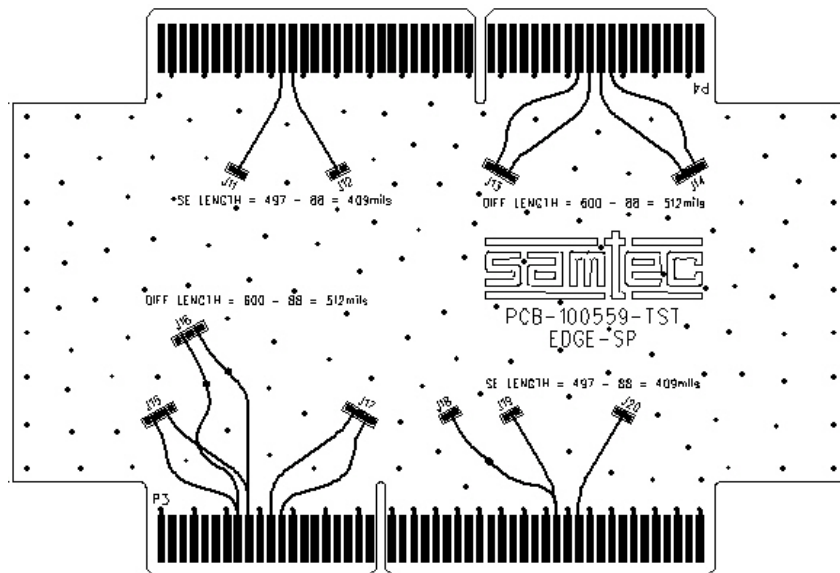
PCB-100559-TST, EDGE-SP, Dual Configuration Edge-Card Fixture Used for All Short Signal Path Measurements
